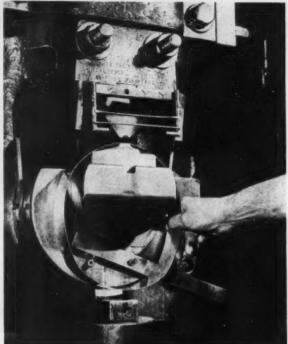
After flash is removed from the weld, it is struck or coined while held over this horn die in a PA3 Ferracute press.
